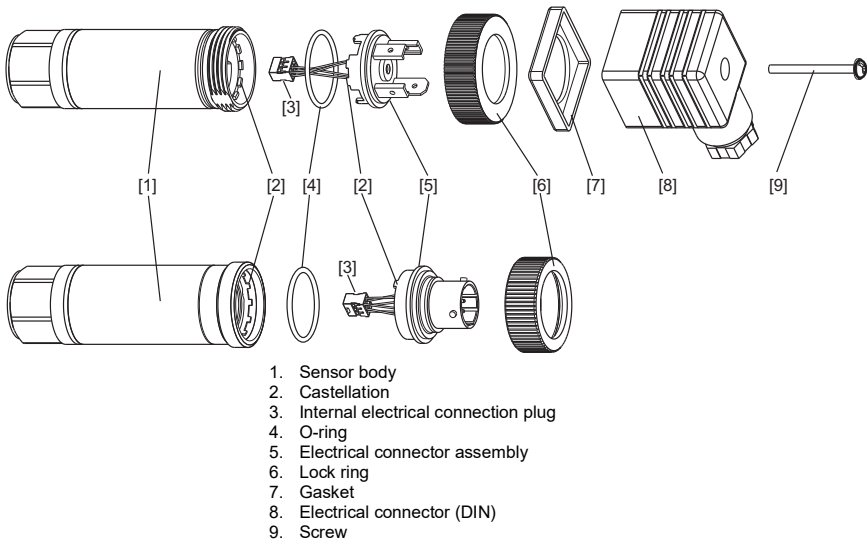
UNIK5000, 5600, 5700 Series – Zero and Span Adjustment (Disassembly and Assembly)
